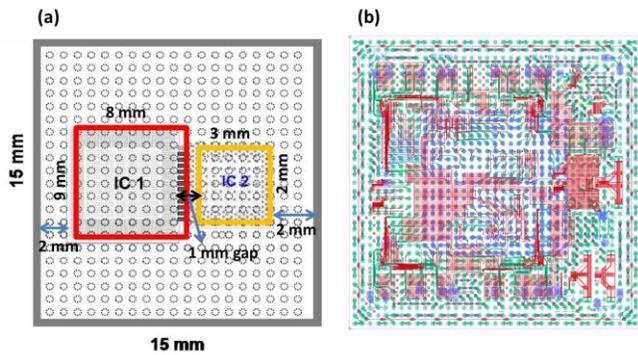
Multi-chip FOWLP layout (a) side-by-side chip layout in package (b) Daisy chain test structures
